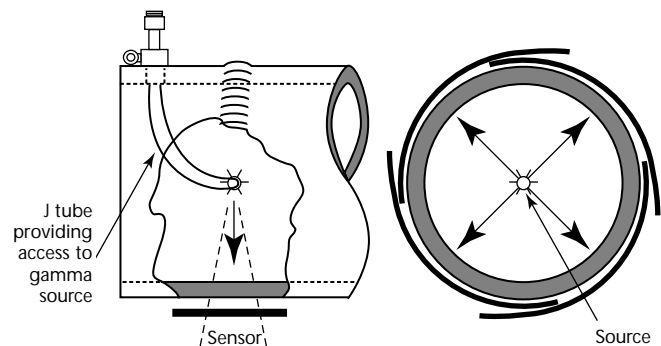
Panoramic technique using J tube guide tube and gamma access hole holder.<sup>23</sup>
